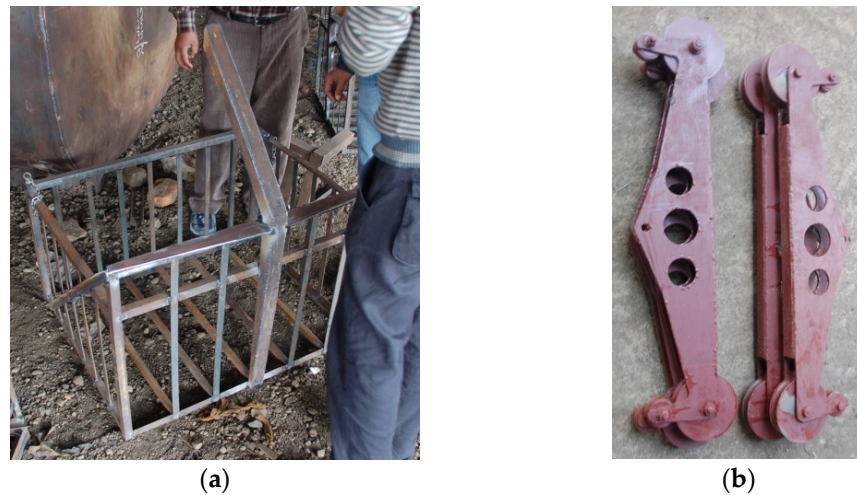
Basket and assembly mechanism for connection to the tractor cable: (a) basket; (b) mechanism.
